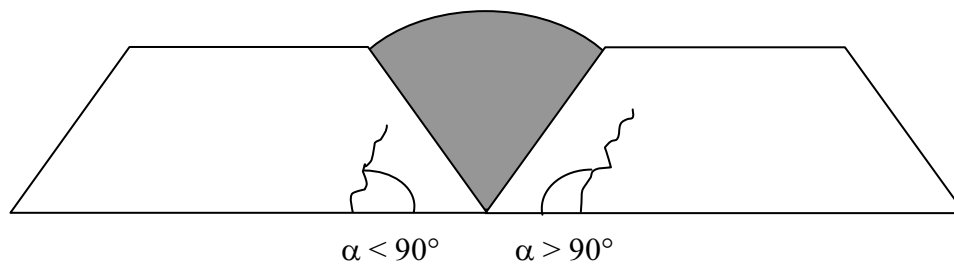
Definition of angles when the crack is located close to a weld
